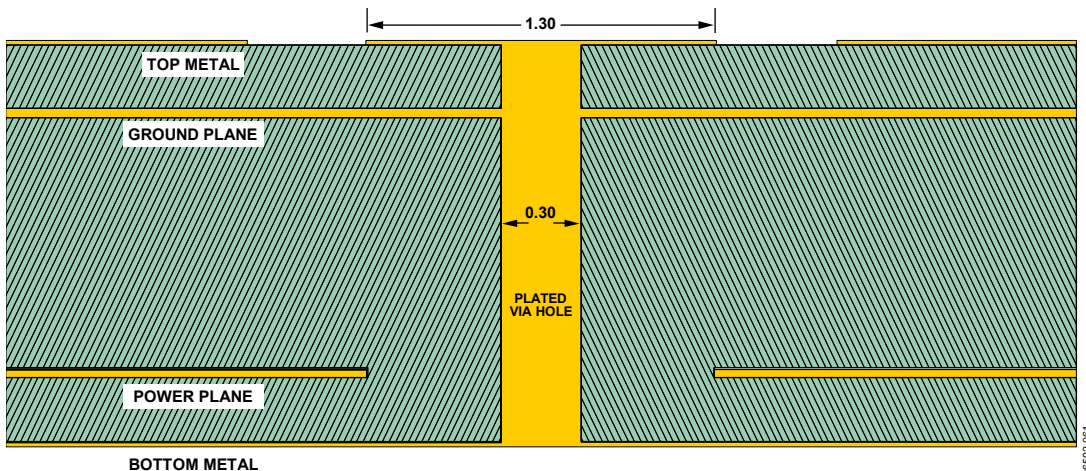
Cross-Section of a 4-Layer PCB (ADA4938-1) Showing a Thermal Via Connection to the Buried Ground Plane (Dimensions in mm)
